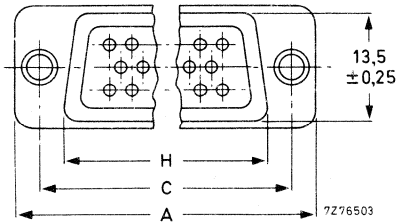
Terminal side of pin (or socket) connector; see also Table 6.
